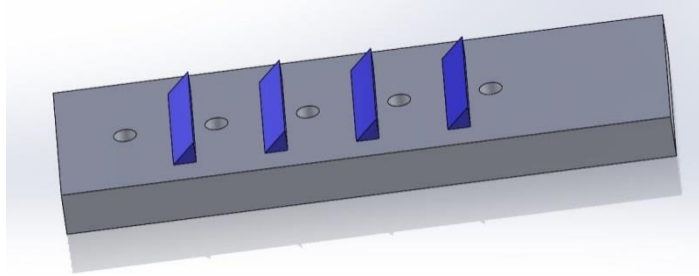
Test Section with 45° Wedges on the Jet Issuing Plate
